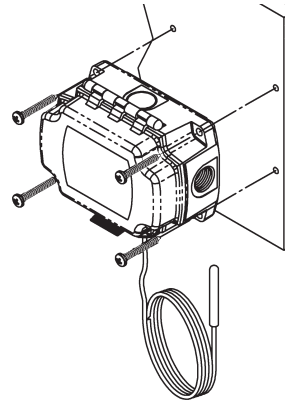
Remote Sensor mounting using the scored break off of the Flexible Probe Bracket (FPB)
